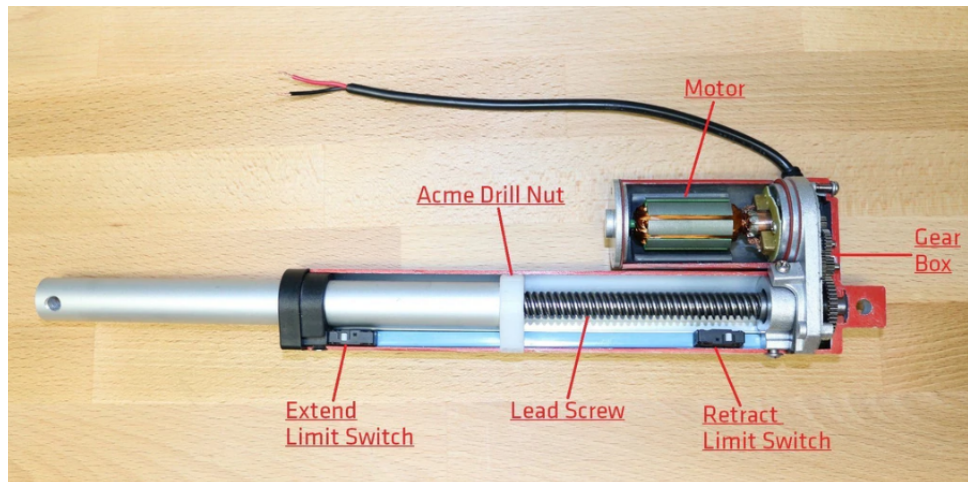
A linear actuator. This technology would enable the conversion of rotational movement (e.g. from an electric motor) into a linear movement that could lift the truck axle (Bong, 2021)
